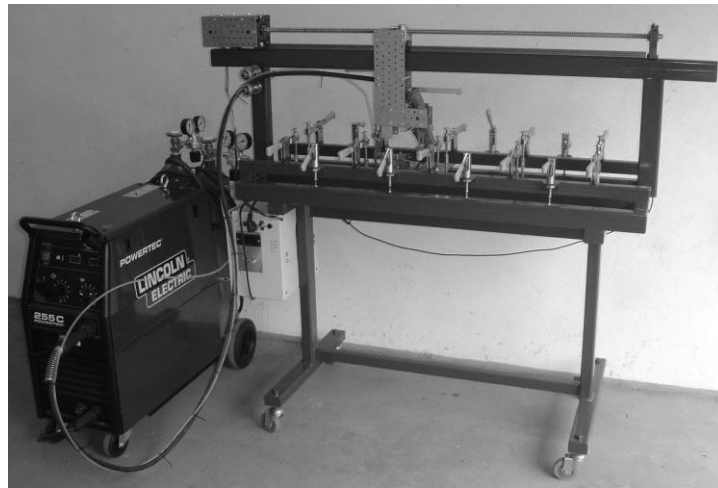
Apparatus for welding with micro-jet injector.
